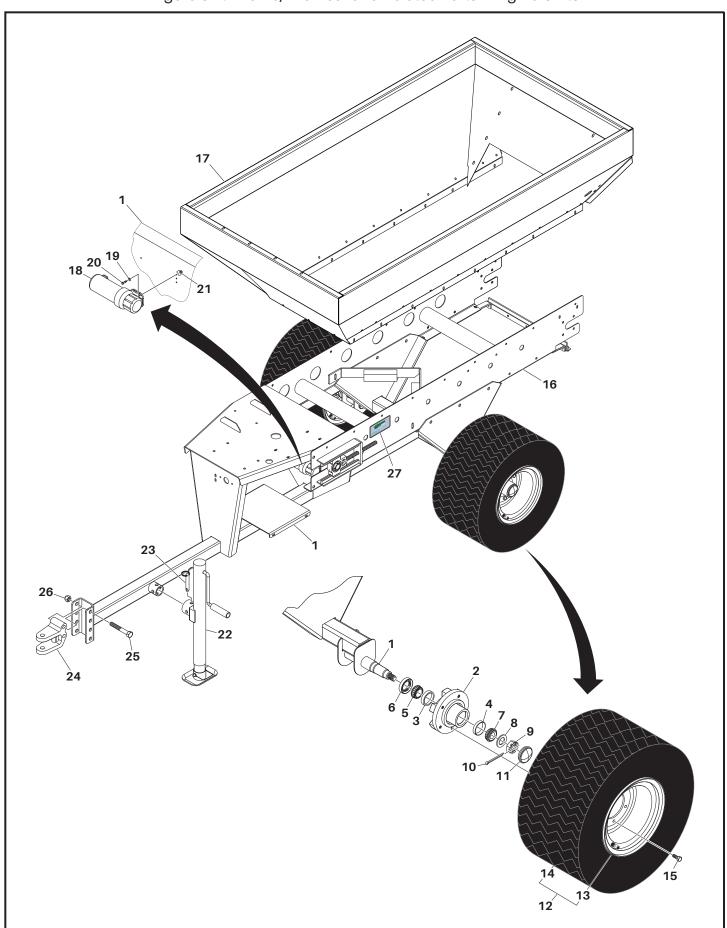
Frame, Drawbar and Related Parts - Engine Units
